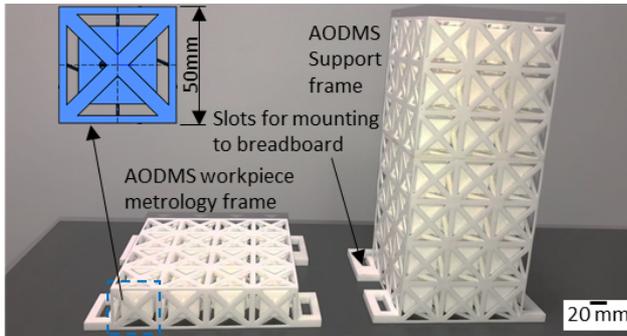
Support frame and workpiece metrology frame as manufactured from Nylon 12.
